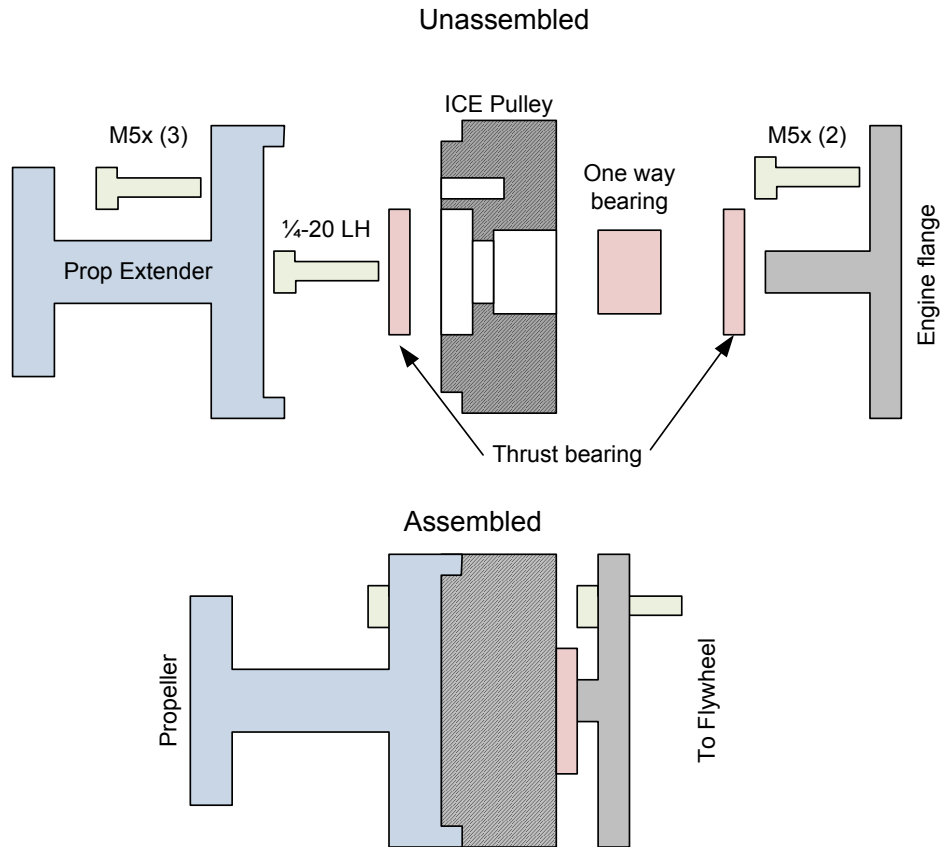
Assembly sketch of the ICE pulley and engine flange (patent pending)
